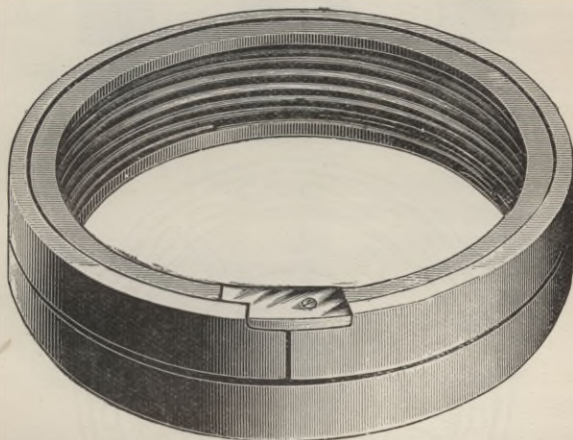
Lancaster Piston-Valve Packing-Rings and Serpent Coil Spring.
